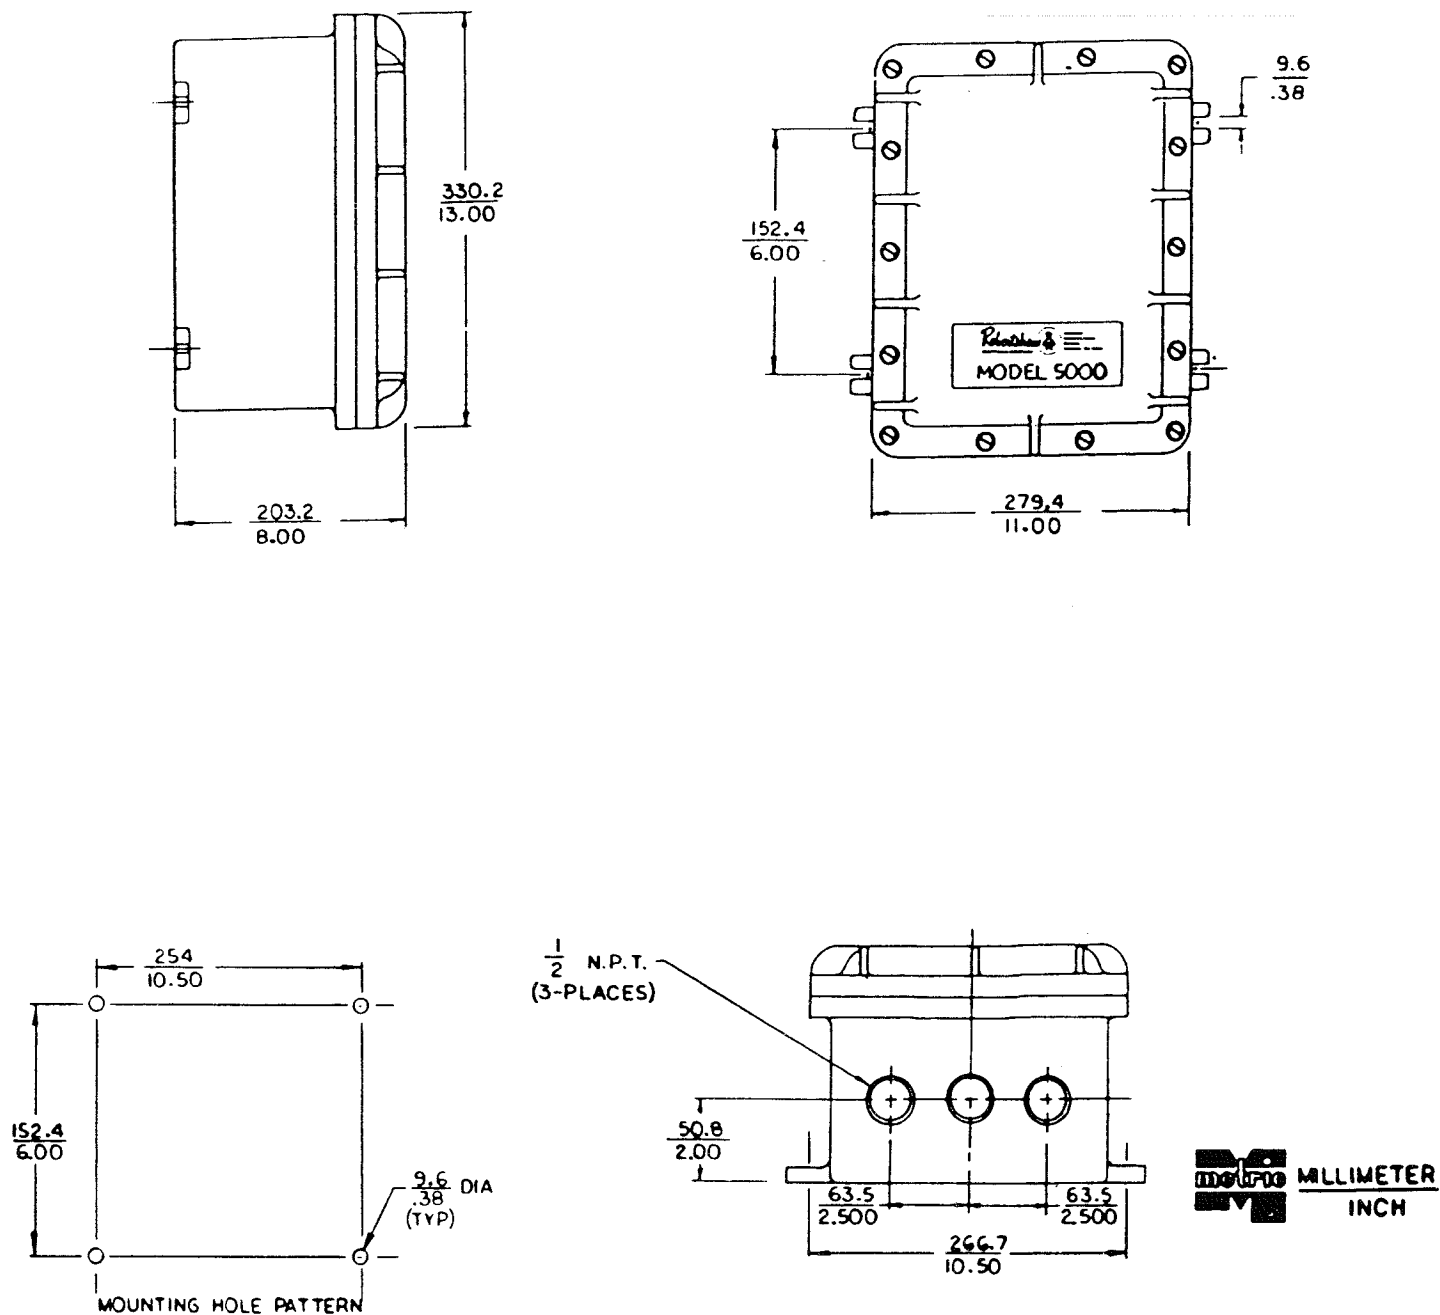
Mounting Dimensions, Display Unit, Explosion-Proof Blind.
